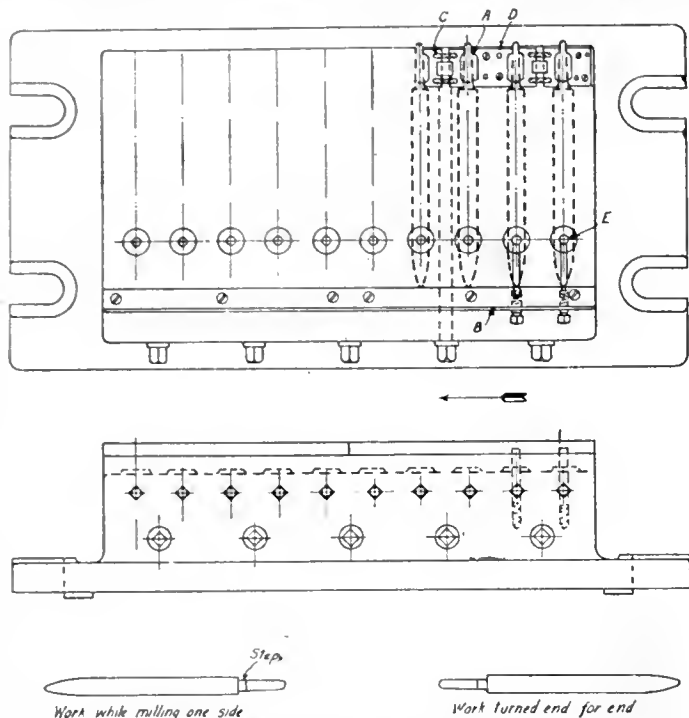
FIXTURE FOR HOLDING BLADES WHILE MILLING SIDES OF TONGUE.
